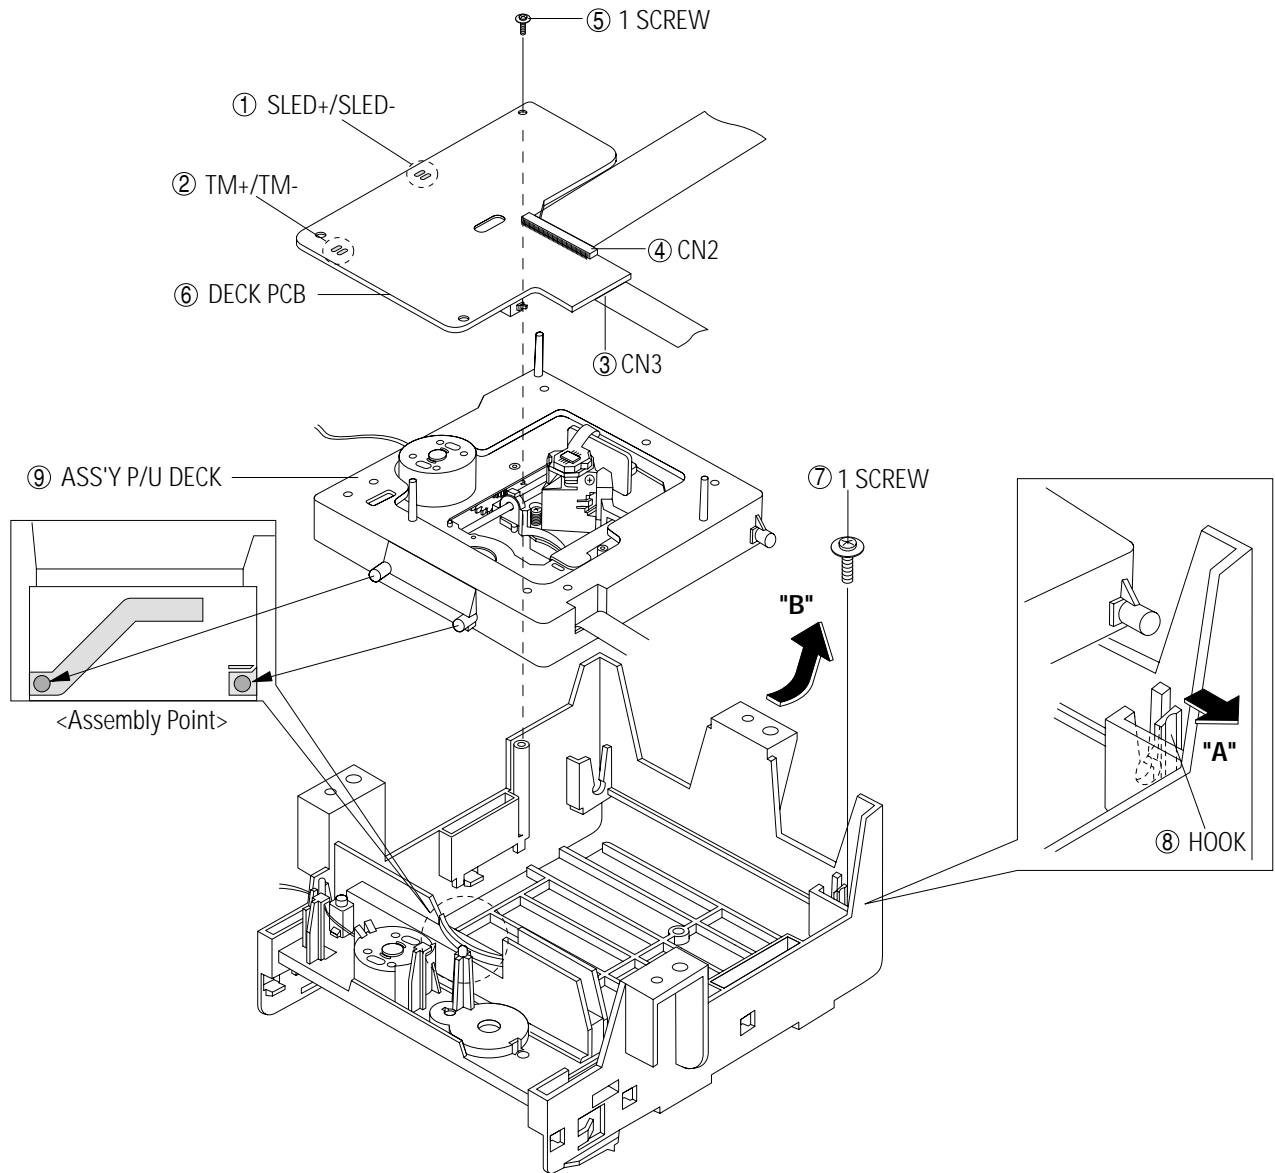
PCB Deck Ass'y and Ass'y P/U Deck Removal
